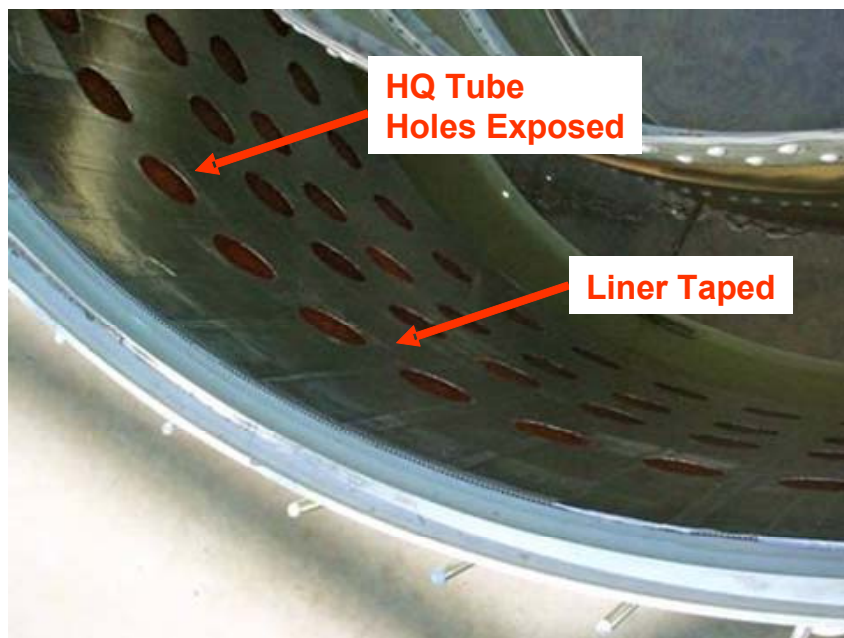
TECH977 Engine With HQ Tubes Installed. The HQ Tubes Opened To The Outer Bypass Duct.
